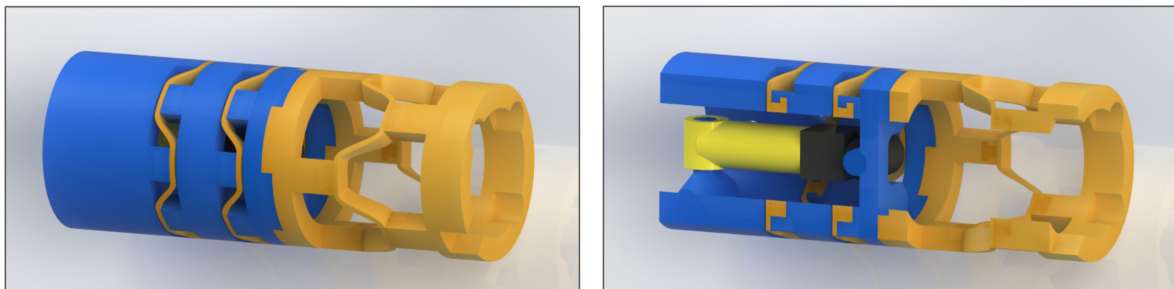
The three-cell metamaterial with the internally mounted linear pneumatic actuator.
